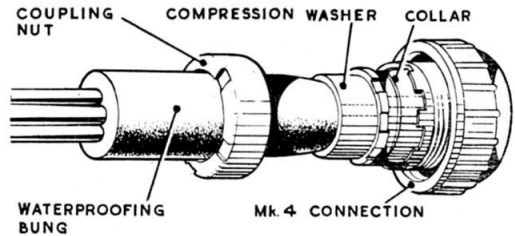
Helvin waterproofing bung on a Mk. 4 connection
